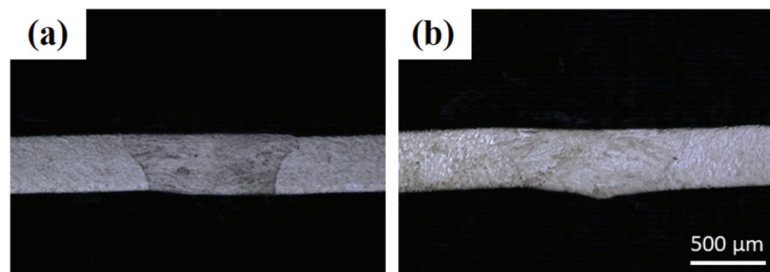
Optical images of laser-welded 0.5 mm thick sheets’ cross-sections without powder addition and with laser power = 1000 W, laser scanning speed = 2.4 m/min, gas flow rate = 5 slpm, and robot tilt angle = 0°: (a) top view and (b) cross-section.
